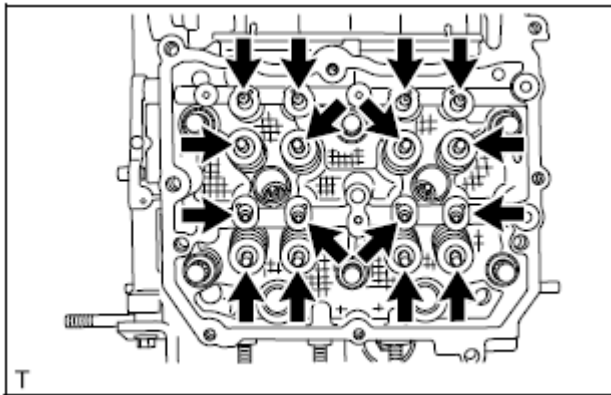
Identifying Cylinder Head Cover Sub-Assembly Valve Adjusting Shim And Roller Rocker Arm Pivot
